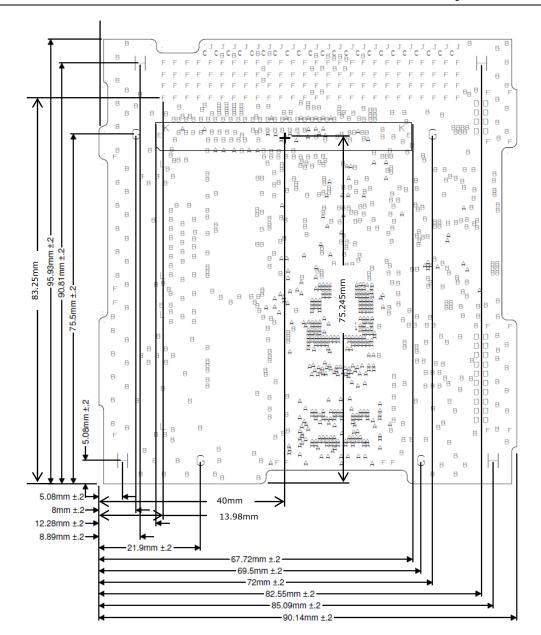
Drills, mounting points, J2 centre and H1 pin1 location (top view).
